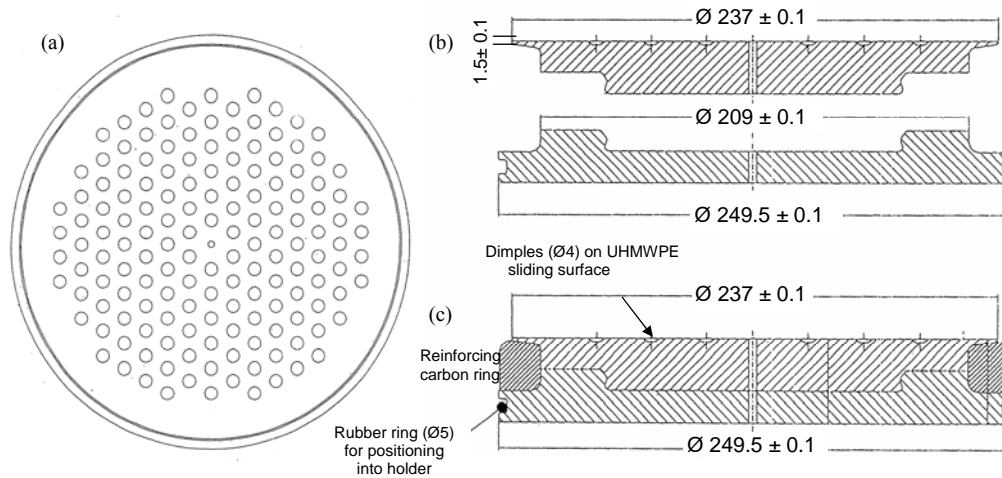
Hybrid UHMWPE pad or bearing element, (a) top view, (b) exploded view, (c) assembly
